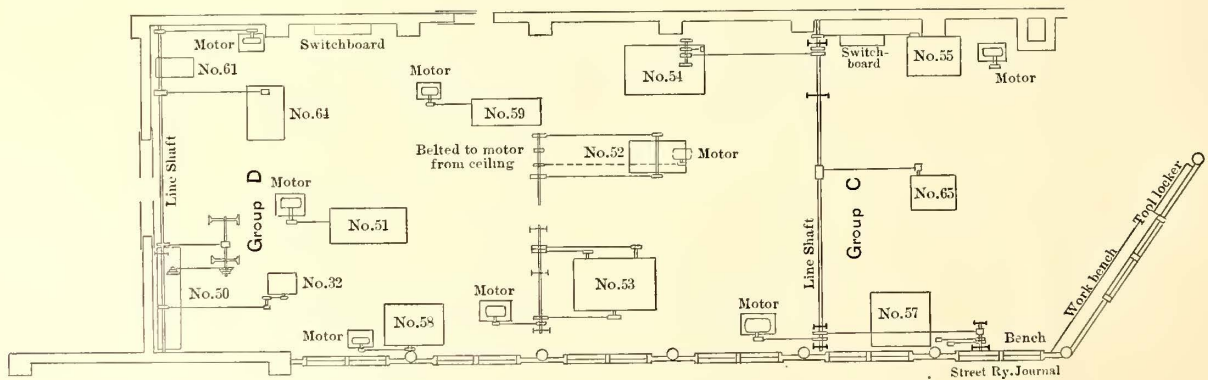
PLAN OF MILL ROOM, SHOWING LOCATION AND DRIVE OF WOODWORKING TOOLS
